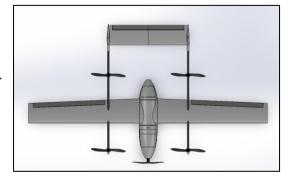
SolidWorks assembly of the hybrid boom tail aircraft
